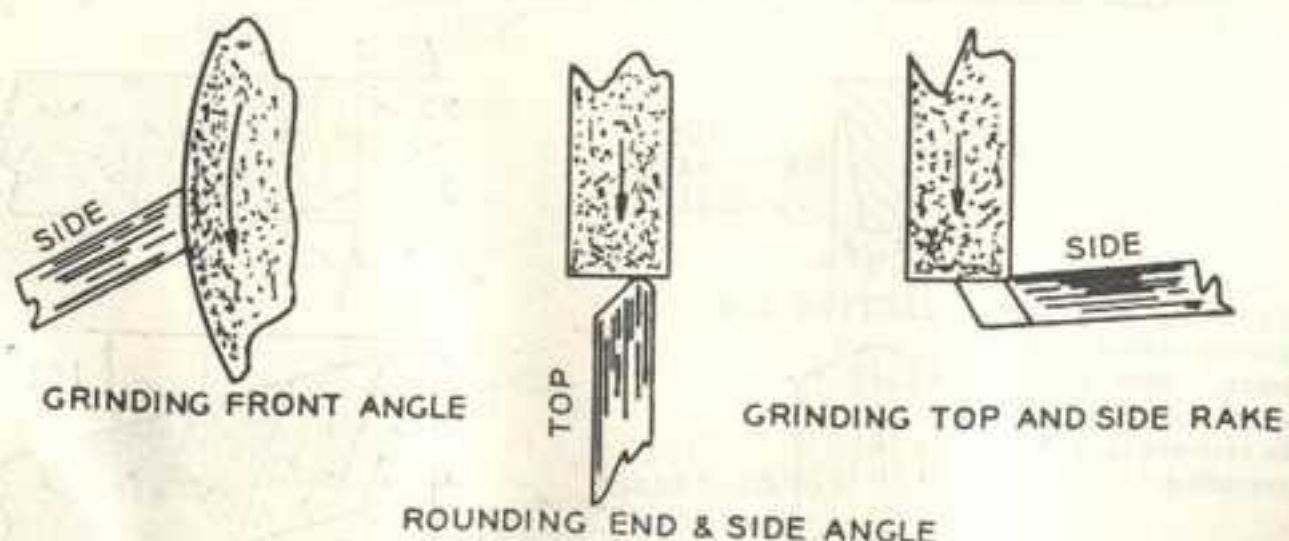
Three views of the process of grinding a R. H. turning tool bit.
